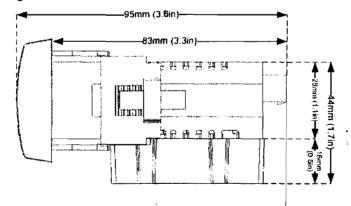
FX06 Controller and Panel Cut-Out Dimensions
